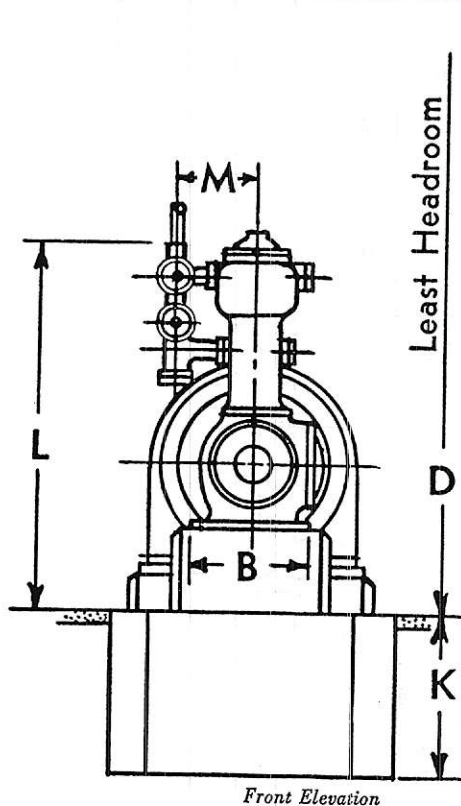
Dimensions, Direct Connected Compressors, Motor Driven - 11-1/2" x 10"
